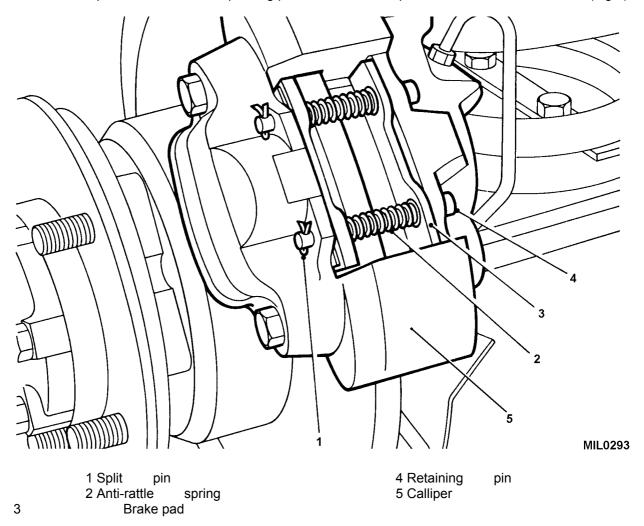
Removing the rear brake pads (TUM and Field Ambulance)
